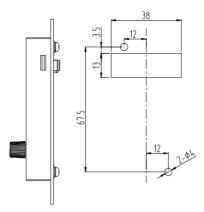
Cabinet hole dimensions when control panel remote mounting required
